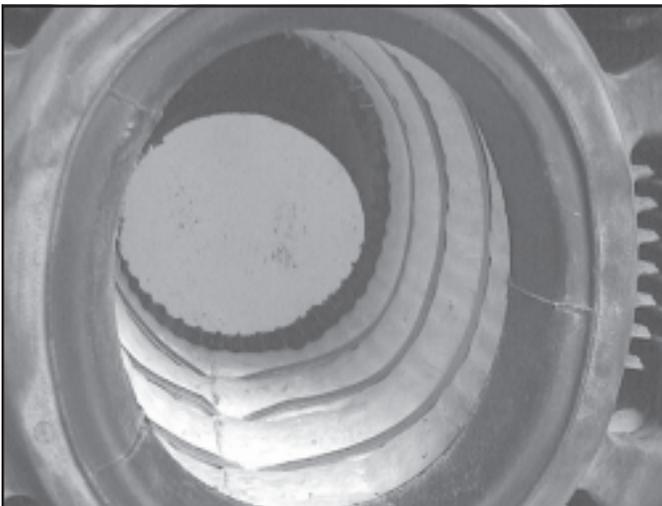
The back plate liner and the chamber sleeve liner are installed. Use the metal bands supplied with the boiler to hold the liner sleeve in place.
